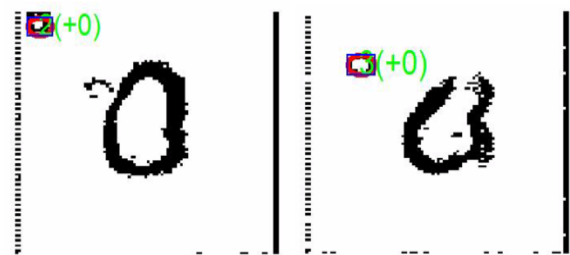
Examples of tracked spatters in laser welding scenario.
